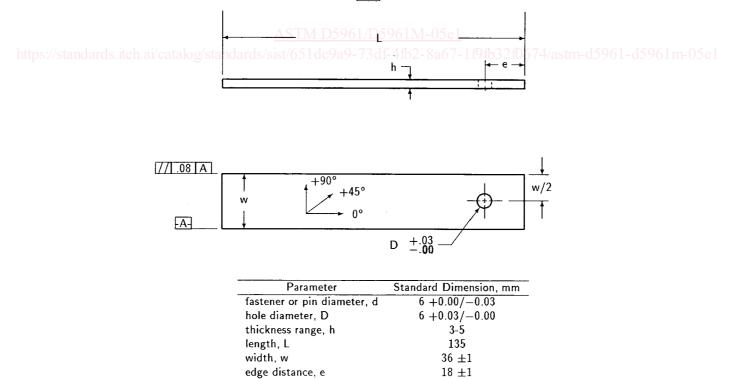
Double-Shear Test Specimen Drawing (SI)
